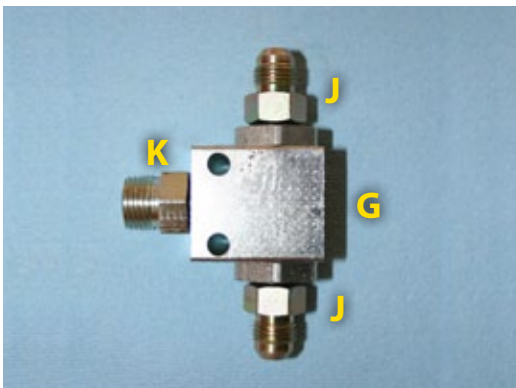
Installing the Tractor Load Sense Shuttle Adapters
